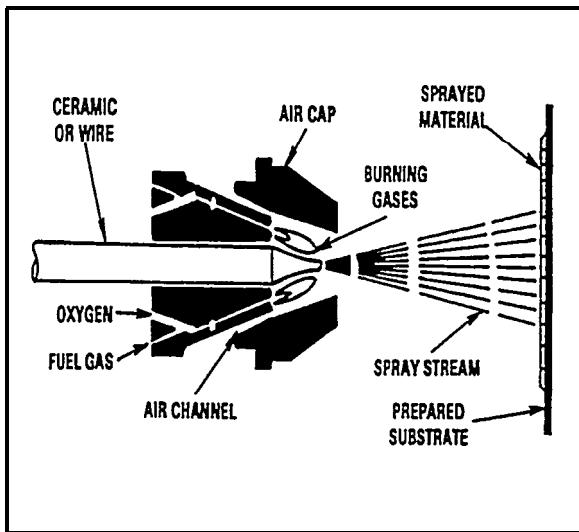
Cross Section of Typical Combustion Wire Gun
